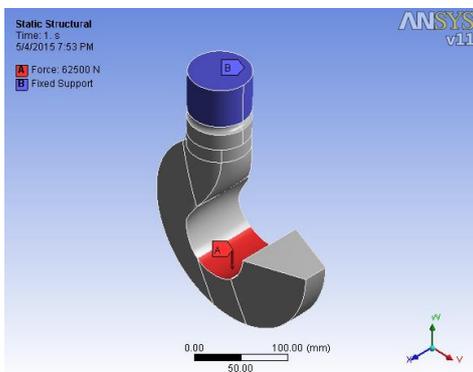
Sketch showing Boundary conditions for trapezoidal cross-section
